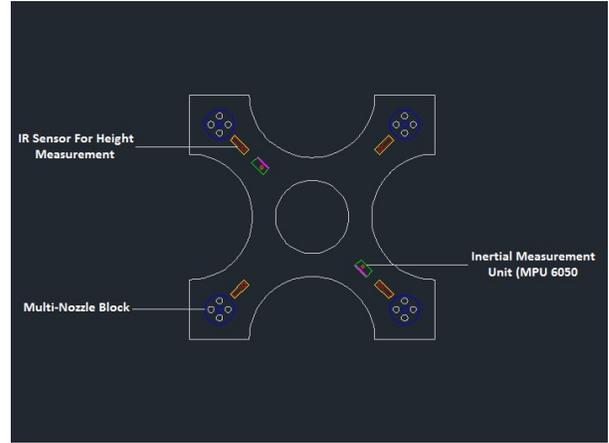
Mounted Components on Mobile Platform (Bottom View)
